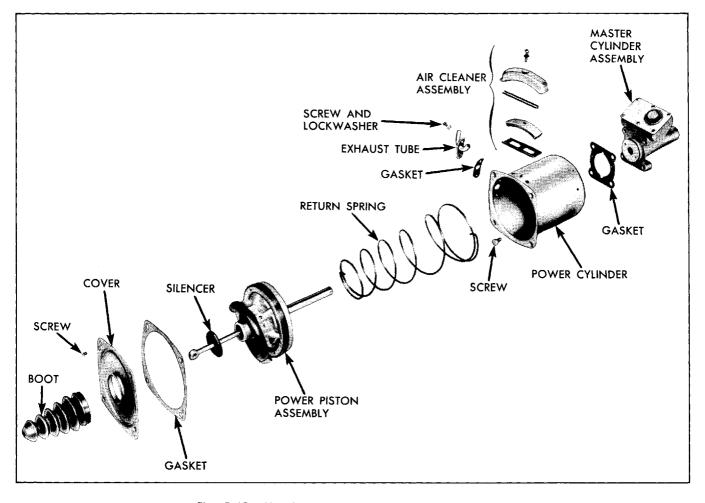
Moraine Power Brake Unit—Exploded View
